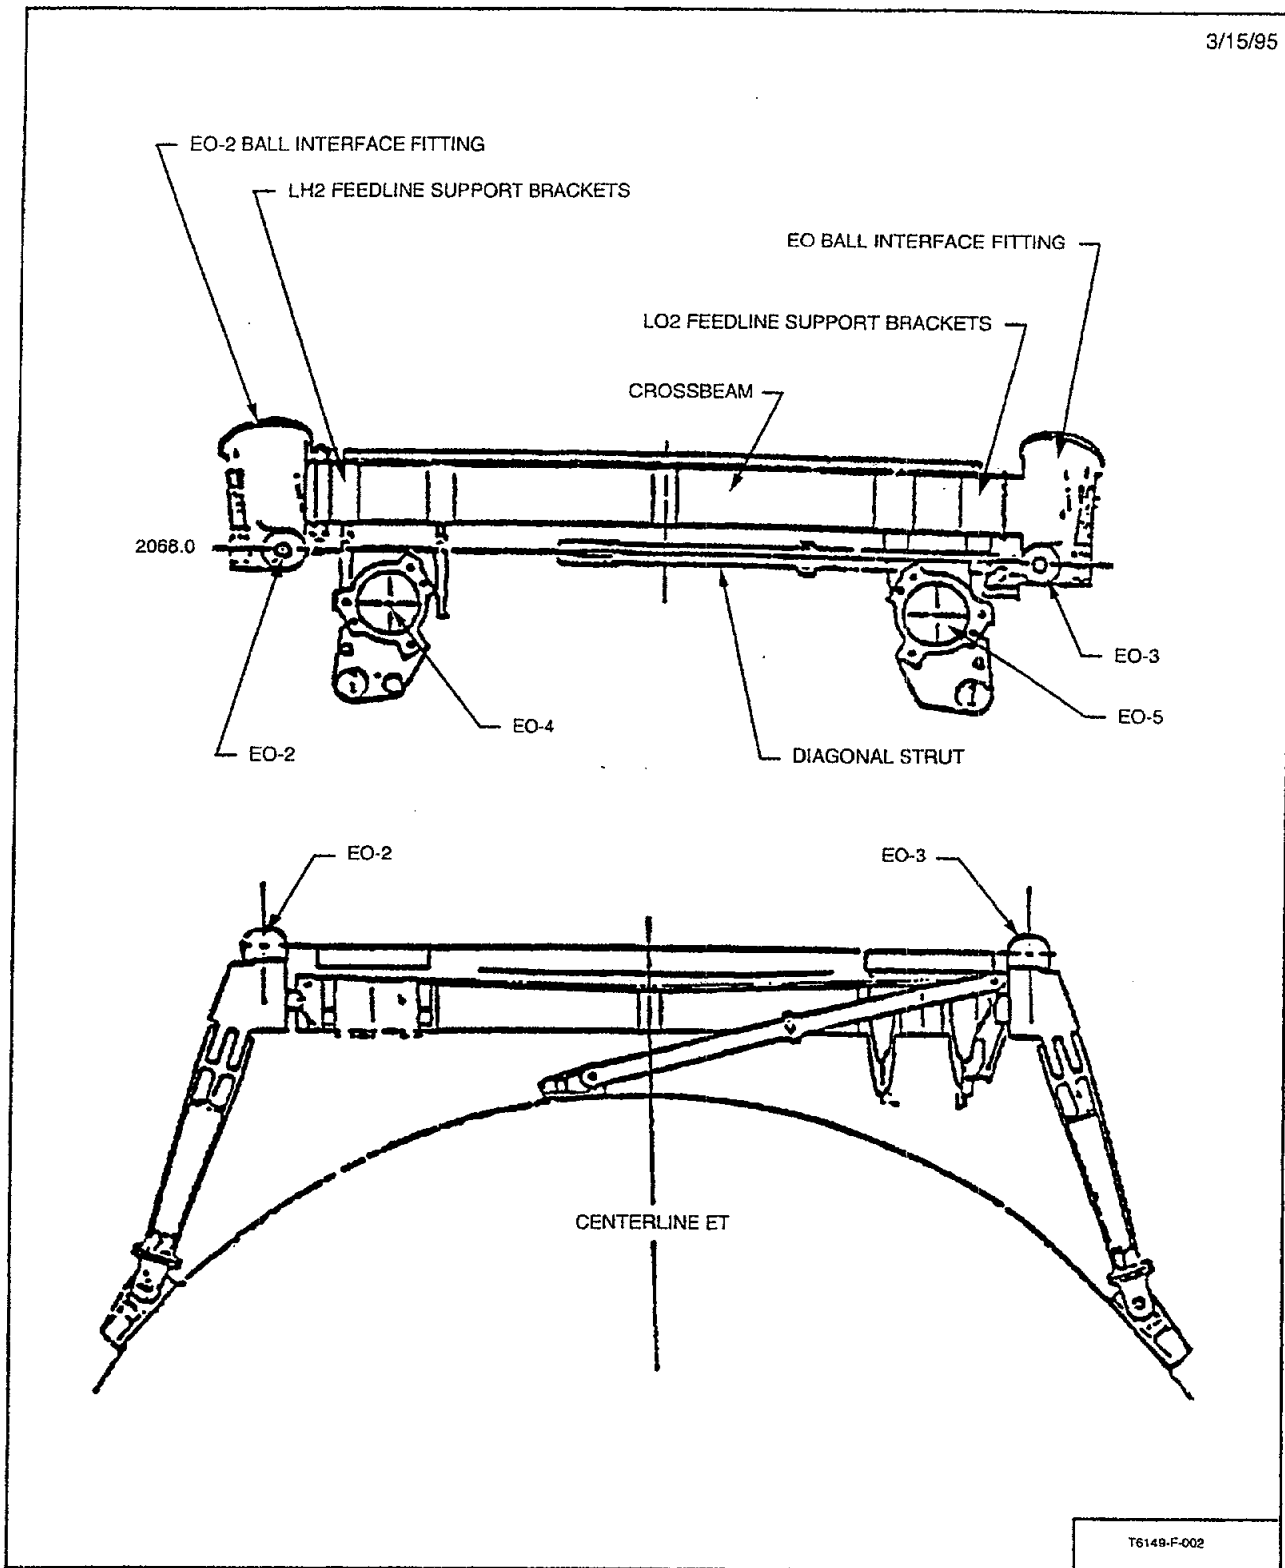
ET/ORBITER AFT INTERFACE ATTACH XT2058
